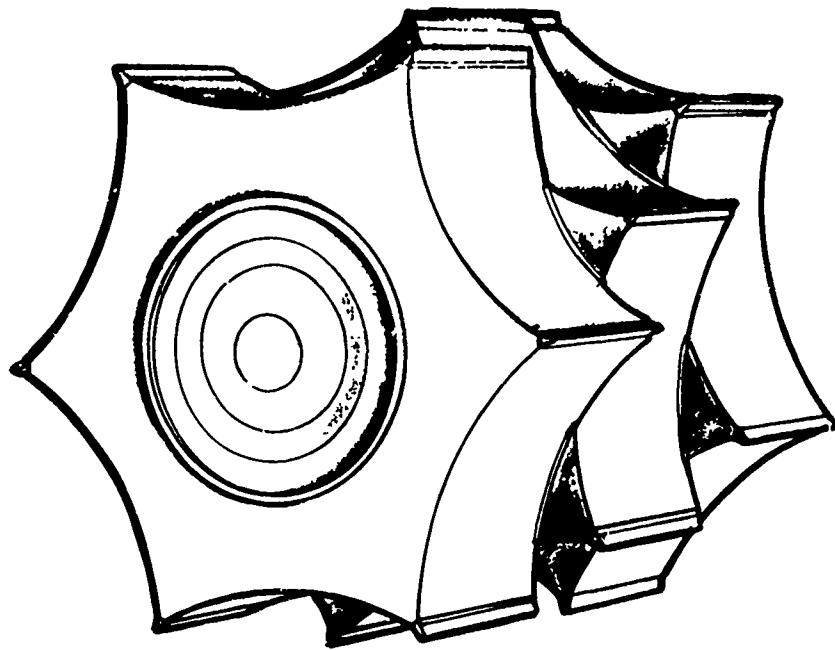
POSSIBLE DRUM DESIGN - 18 POINT
